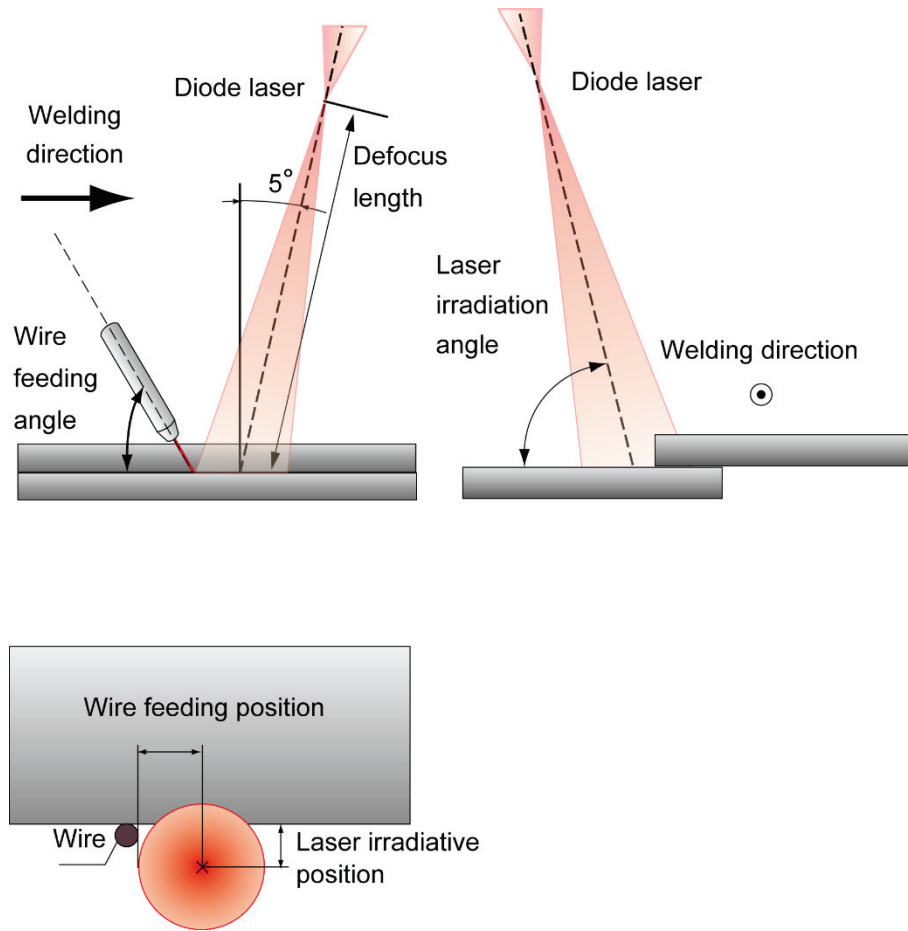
Schematic illustration of experimental set-up of Hot-wire Laser welding ($t=2$ mm, Diode laser).
